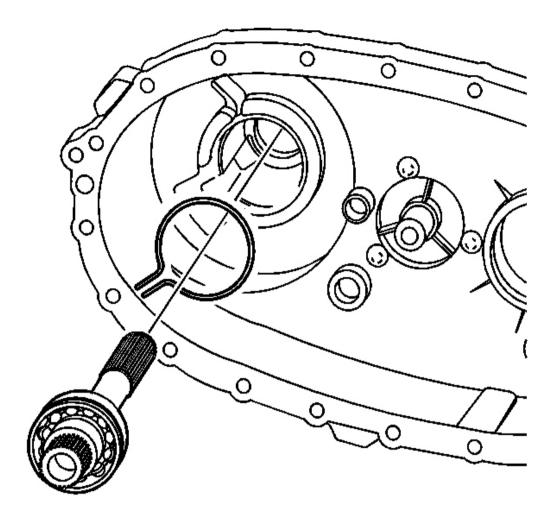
Identifying Rear Output Shaft & Outer Retaining Ring Courtesy of GENERAL MOTORS CORP.
